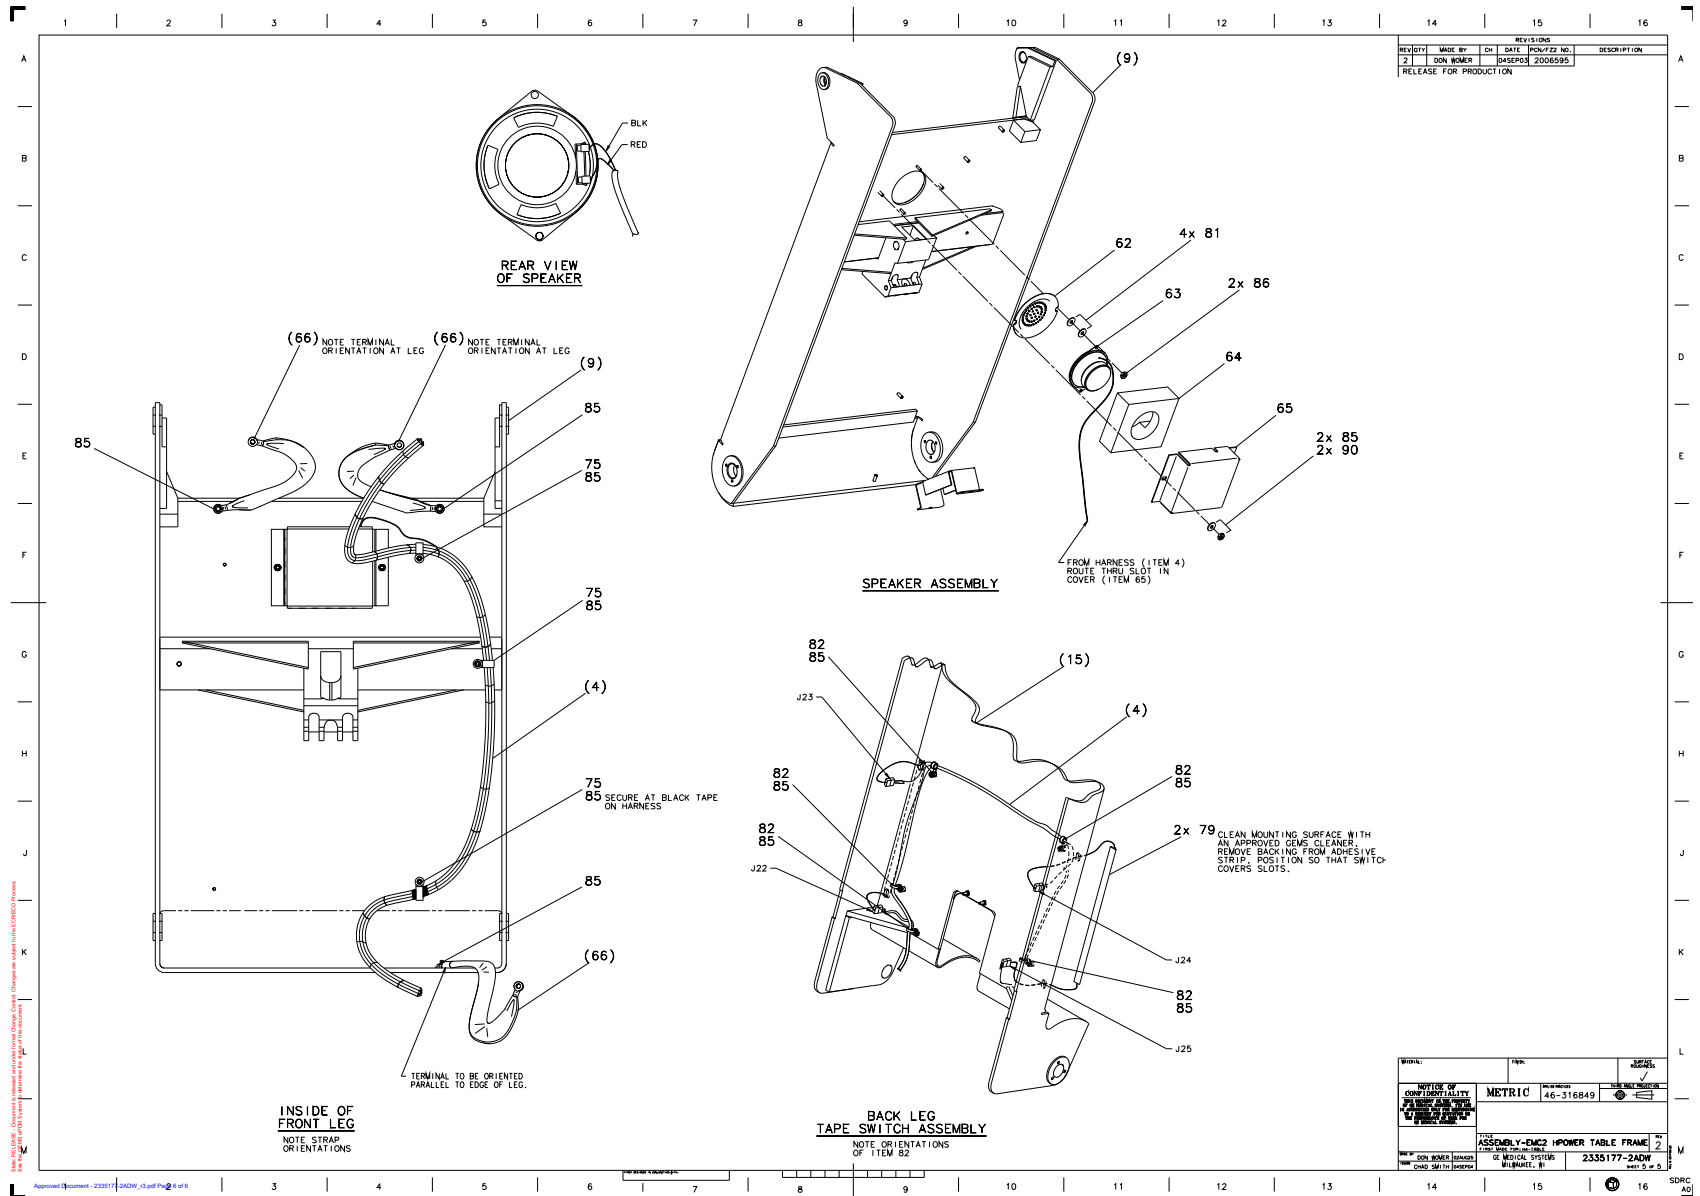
Table Frame Assembly (2335177-2 sheet 5, rev 2)
